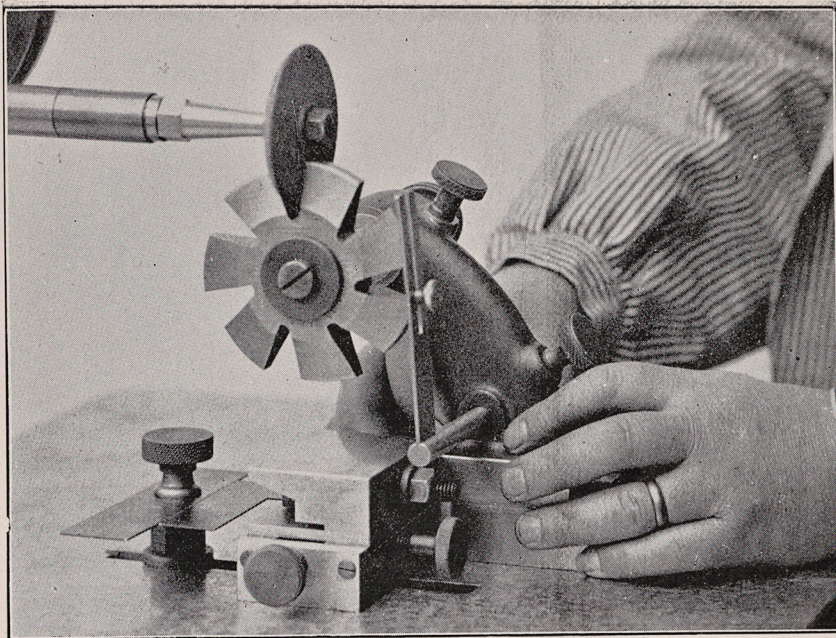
Grinding an ordinary relieved Gear Cutter.
